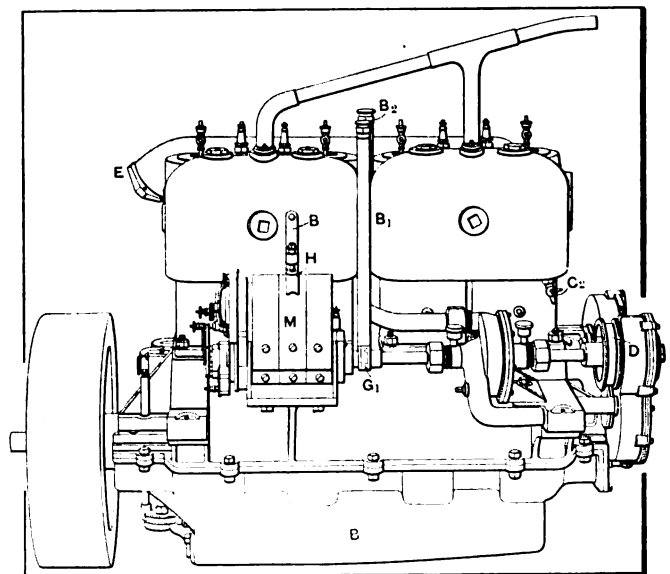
Magneto side of the four-cylinder motor showing the method of drive and attachment
